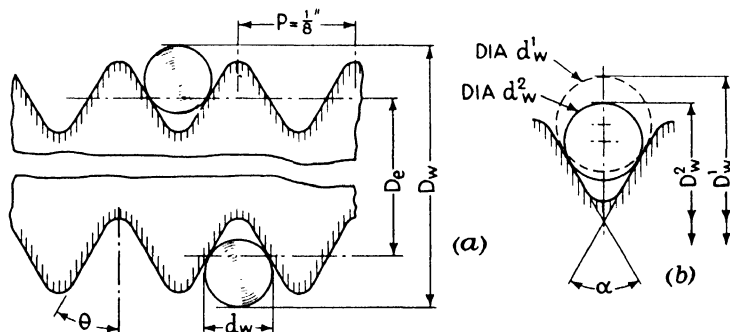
CHECKING EFFECTIVE DIAMETER AND THREAD ANGLE
